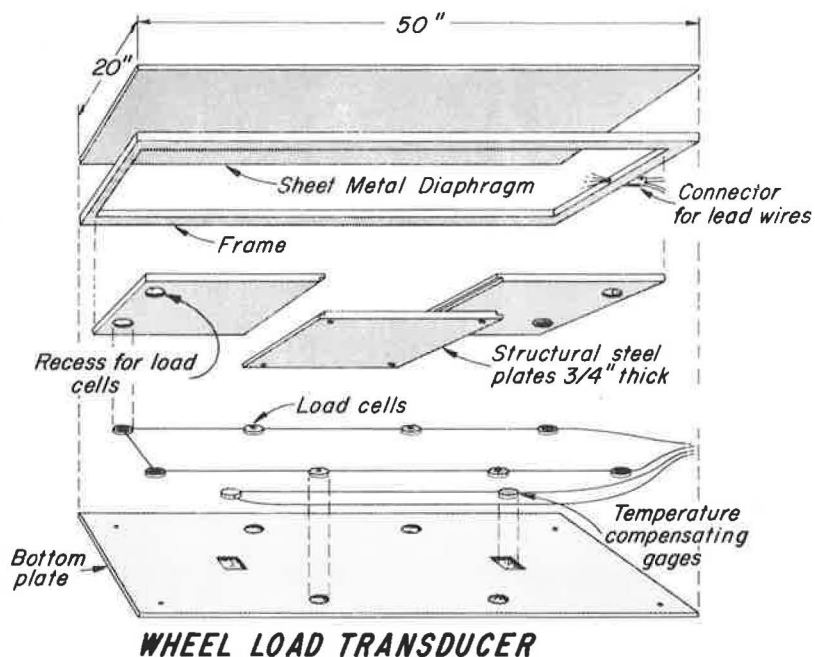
Exploded view of wheel load transducer showing arrangement of plates and load cells.
